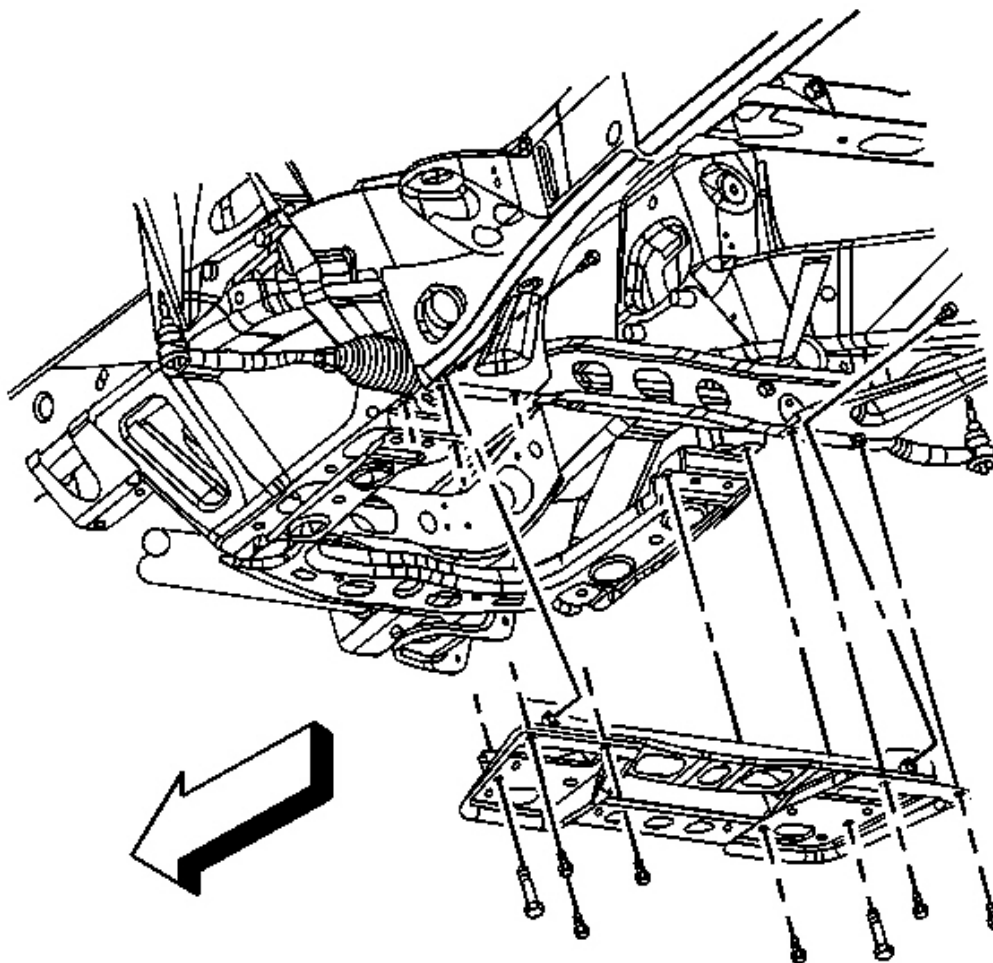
View Of Steering Gear Crossmember Mounting Bolts
